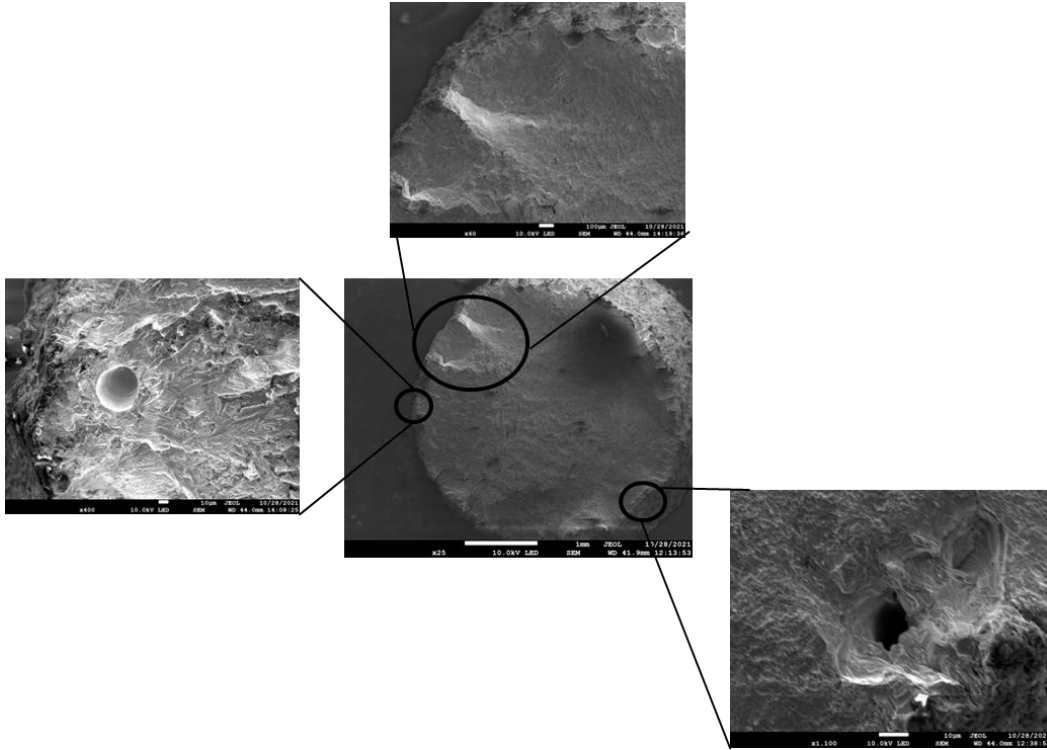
Fractography of fatigue sample 1 fabricated with 330 W.
